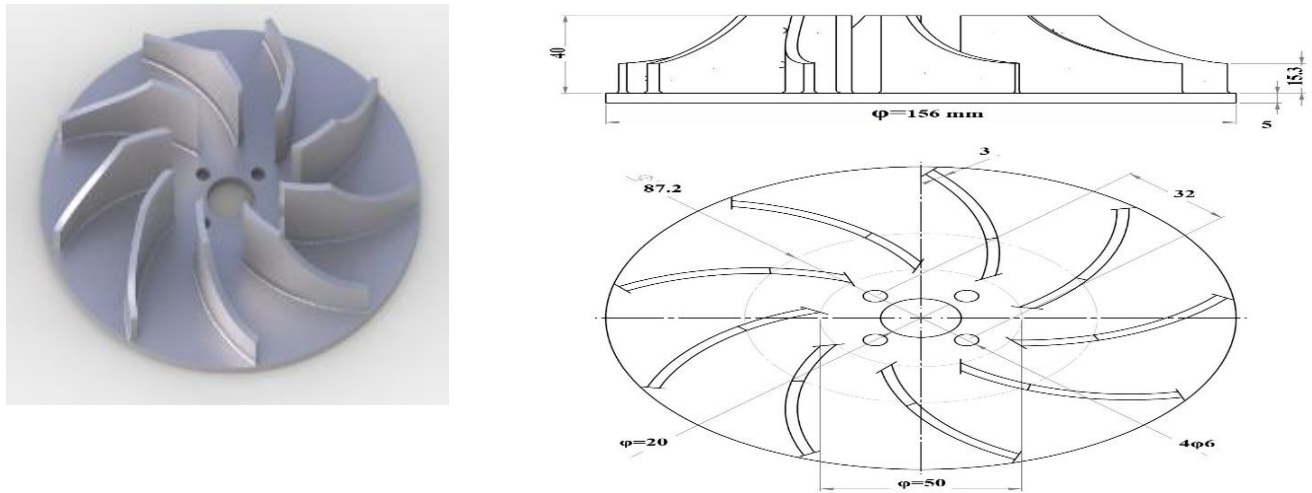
Curved Blade Impeller configuration and dimensional drawing
